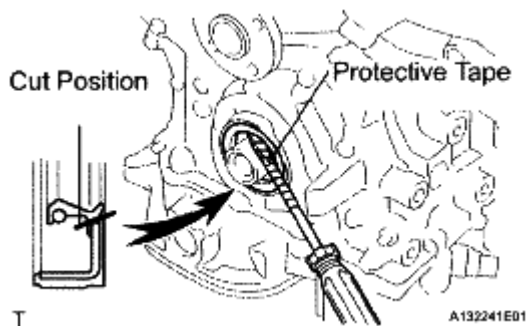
Prying Out Timing Chain Case Oil Seal Using Screwdriver
